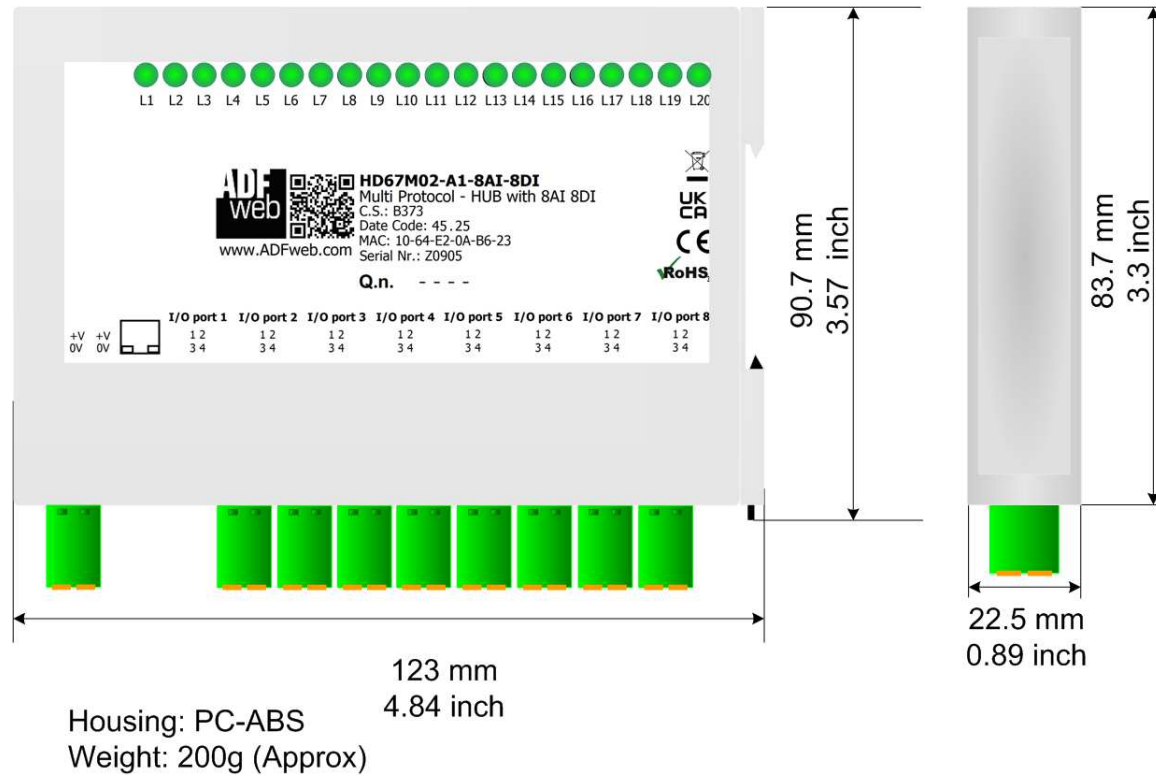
Mechanical dimensions scheme for HD67M02-A1-8AI-8DI
